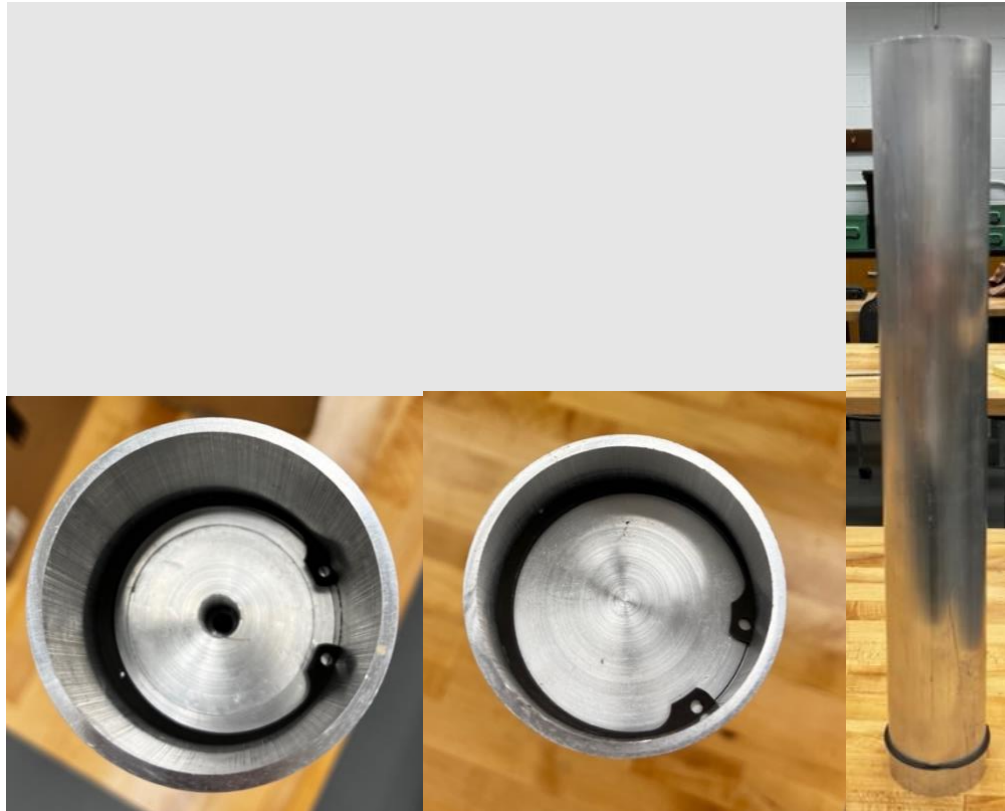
Bottom view (left), top view (middle), and side view (right) of the motor
